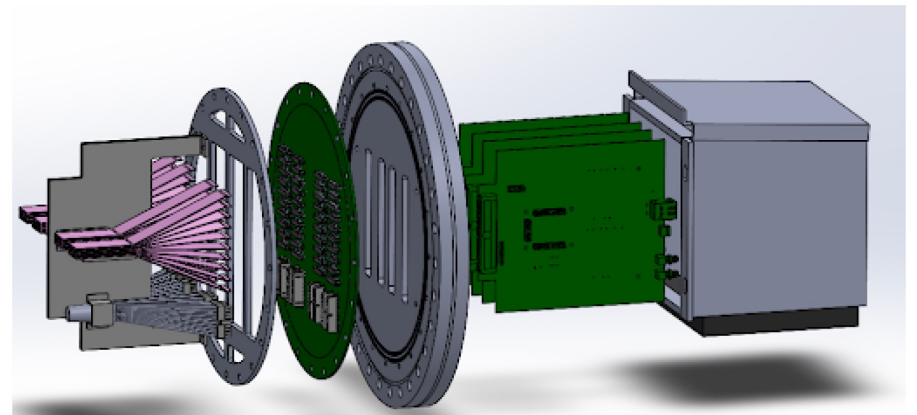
Exploded view of the PACMAN feedthrough assembly composed of four controllers mated to PCB feedthrough.
